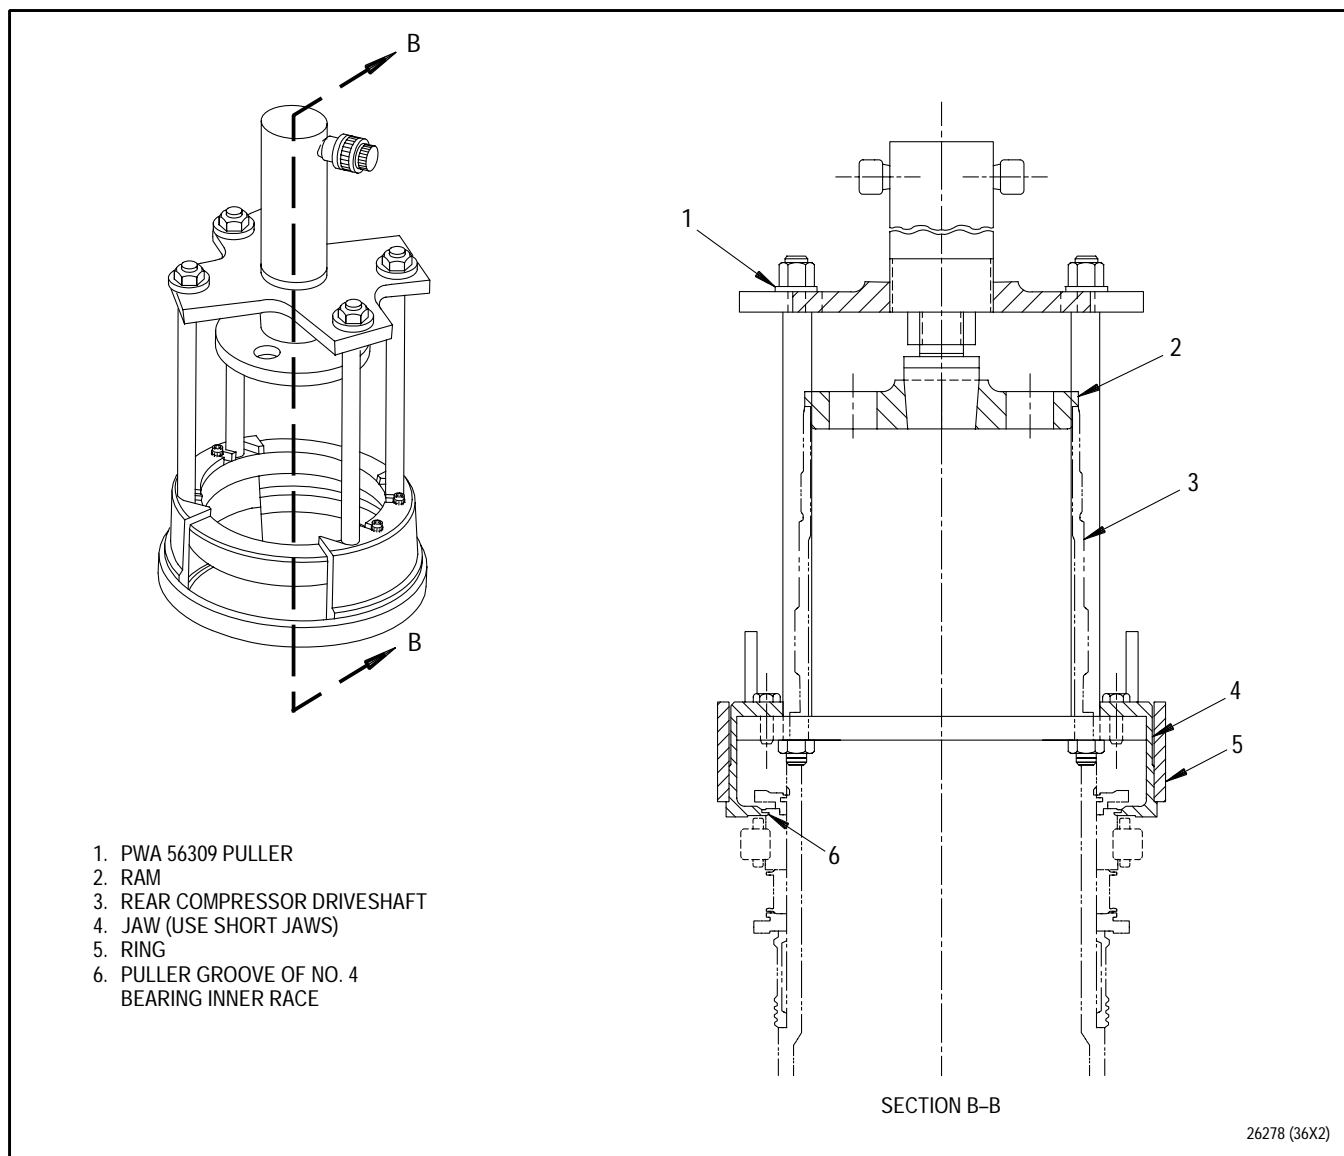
Removal of No. 4 Bearing Inner Race and Rollers With PWA 56309 Puller
